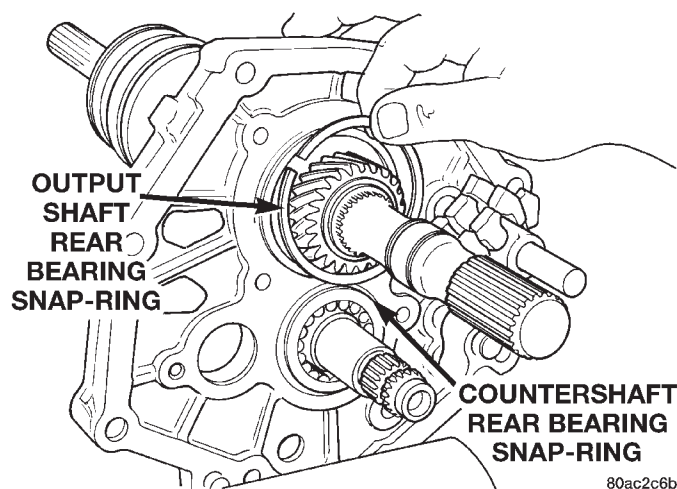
Remove Output Shaft Rear Bearing Snap-ring
